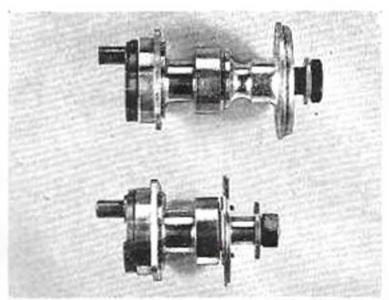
Frontplate assembly using standard prop. driver (top). Assembly using turned spinner backplate as described in previous instalment (bottom).
